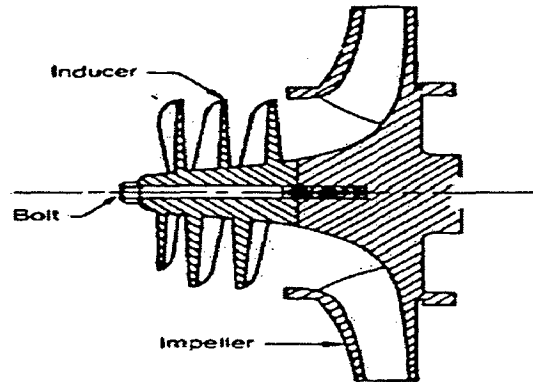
Typical inducer axial-flow impeller attached to a conventional pump impeller.
